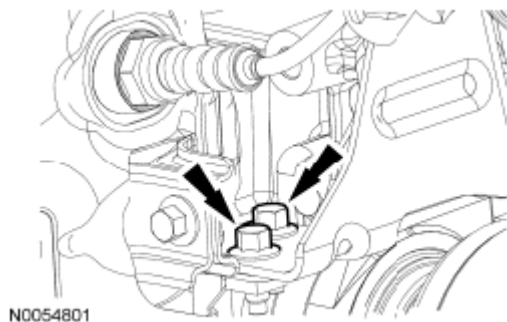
Locating RH Catalytic Converter Bracket Bolts
